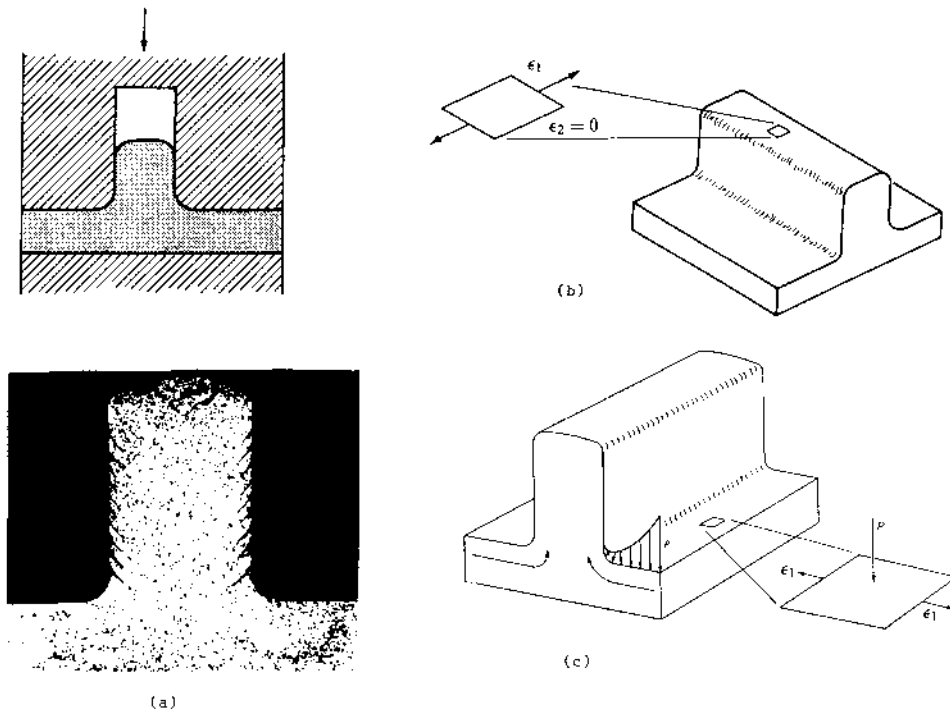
Fracture during rib-web forging of a hard to work alloy: (a) cracking at the top surface and at the corner radius; (b) strain state at the top of the rib; (c) strain and pressure at the corner radius.
